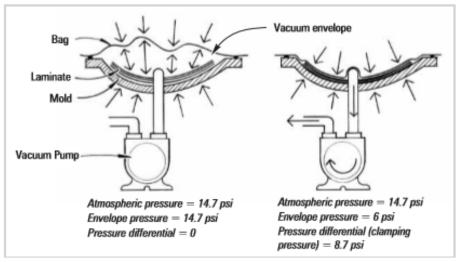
A typical vacuum bagging lay-up before and after vacuum is applied.
